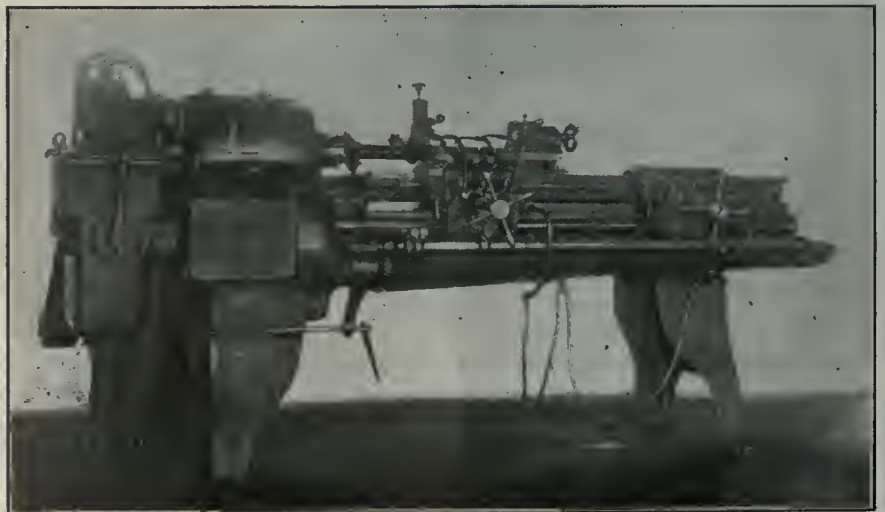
"LO-SWING" MOTOR DRIVEN LATHE.
